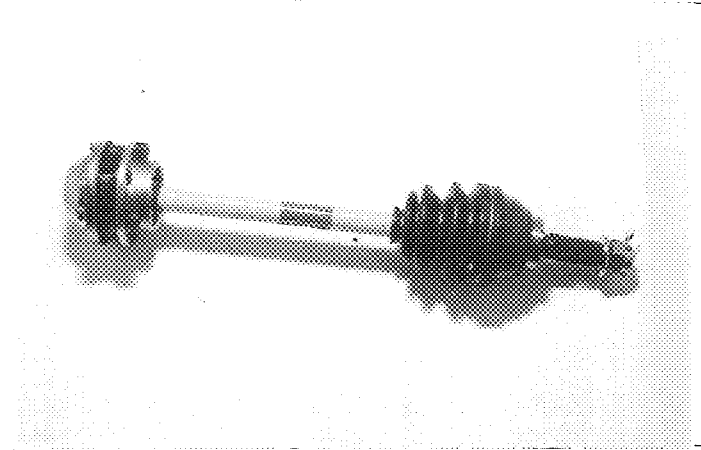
ALTERNATIVE DRIVESHAFT - FRONT
